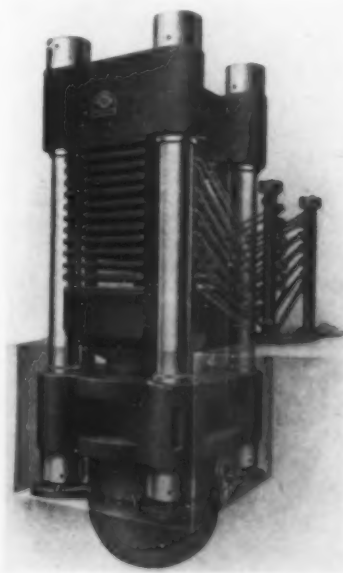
Multi-platen hydraulic press used in making casein solids plates.
